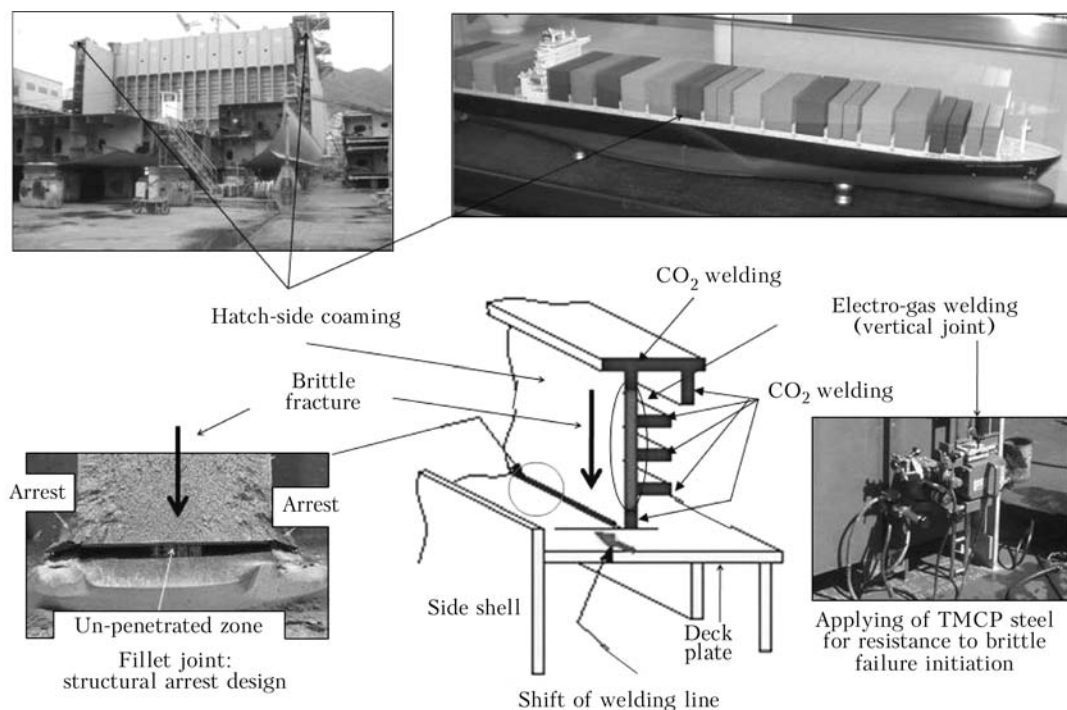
Structure of containership and concept of a safety assurance of welded joint of hatch-side coamings against brittle fracture in design
